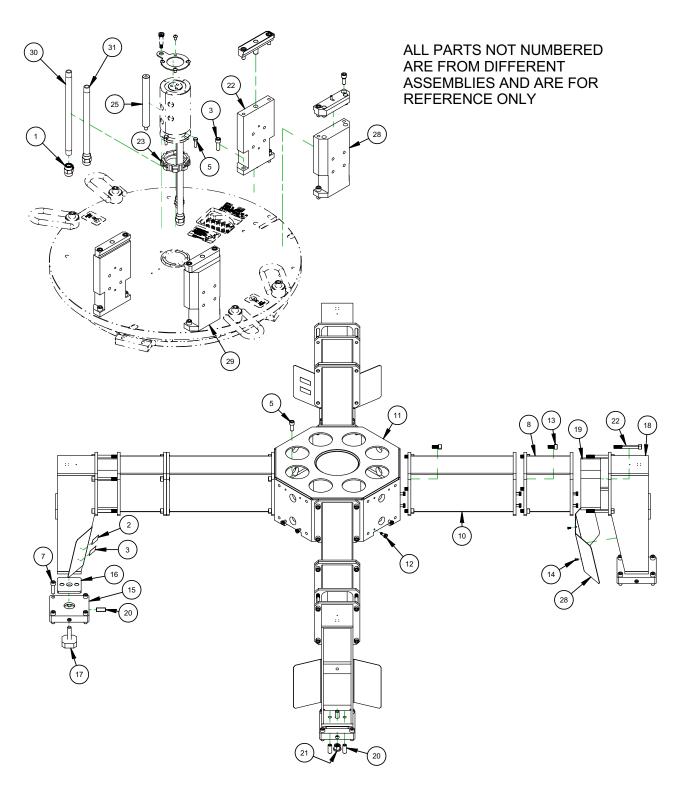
GRINDING ASSEMBLY (P/N 62948)
